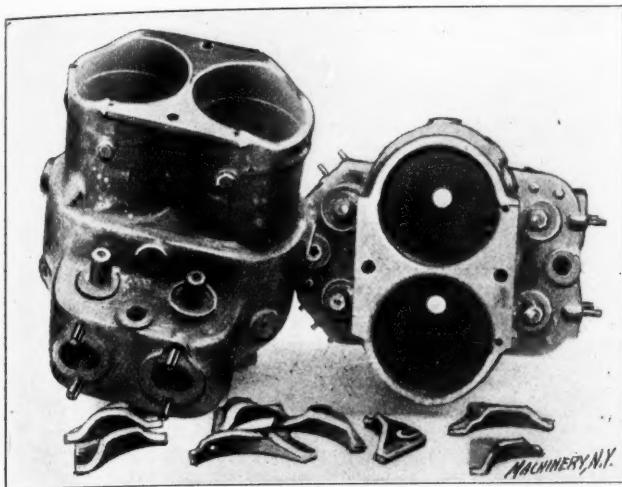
A Badly-broken Casting, illustrating the Possibilities of Autogenous Welding.
